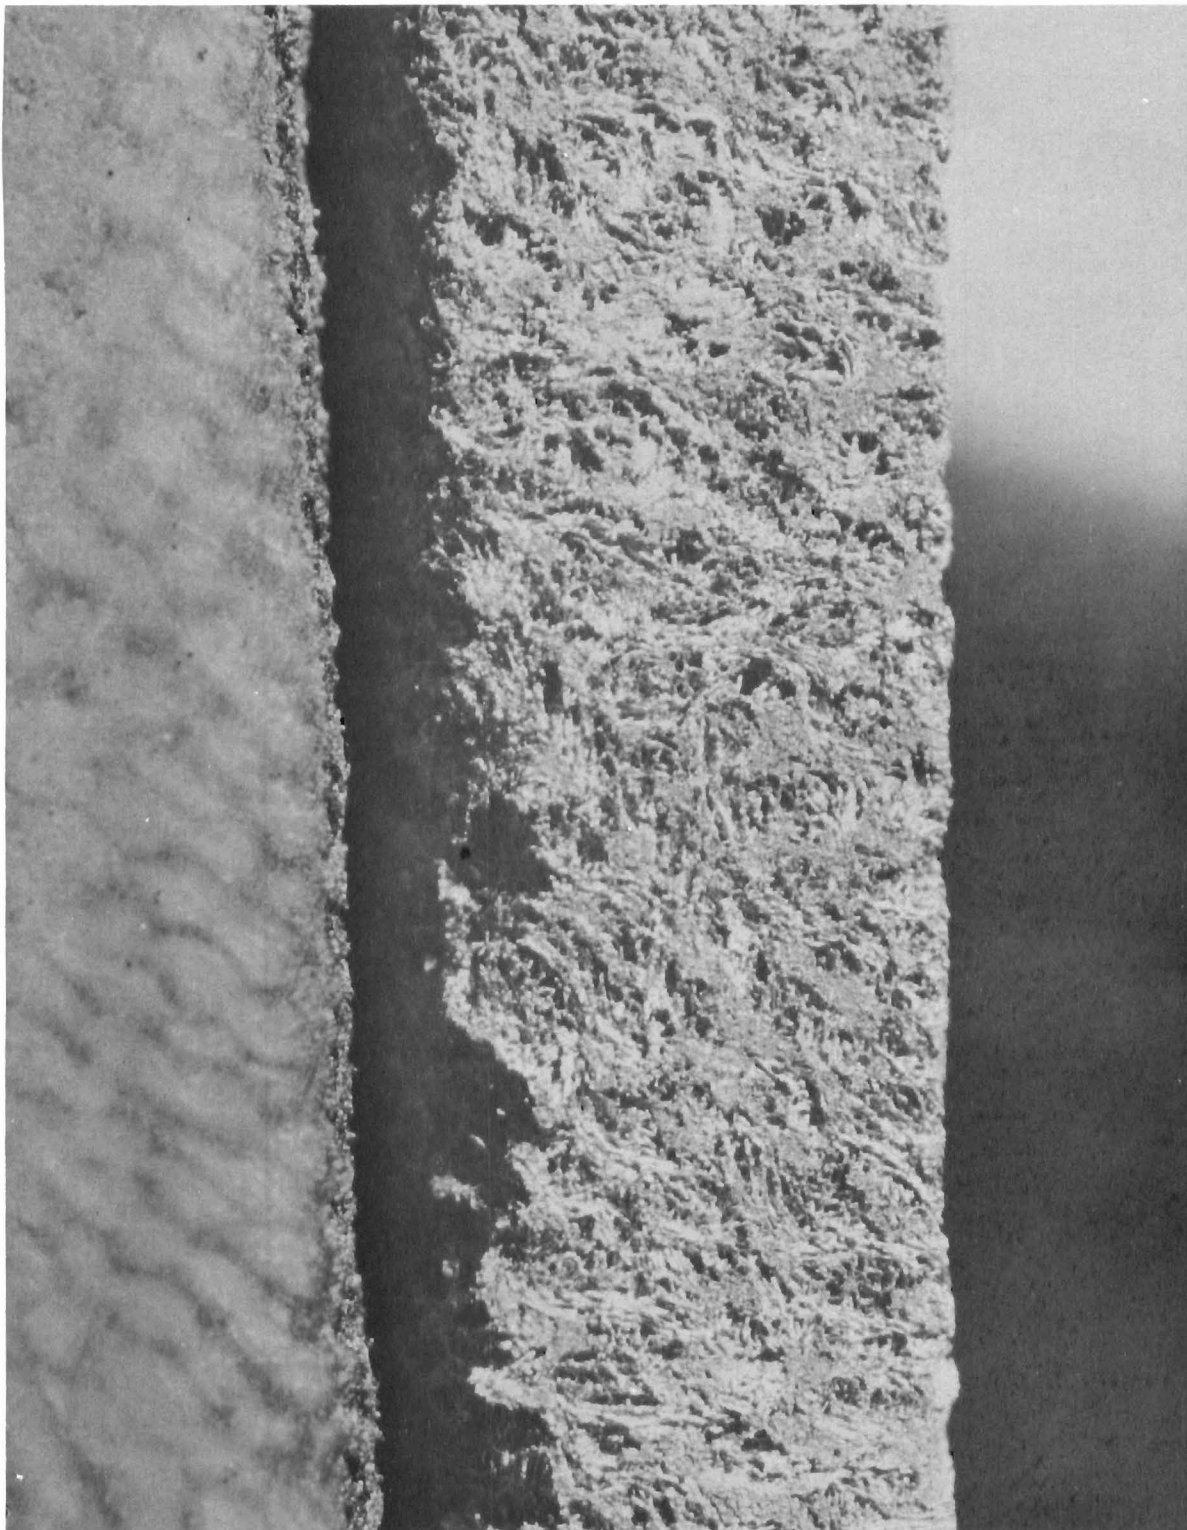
Cross-Sectional View of the Y-32 Specimen after
